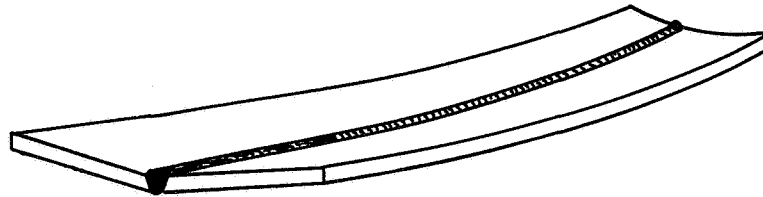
FUNDAMENTAL DIMENSIONAL CHANGES THAT OCCUR IN WELDMENTS
